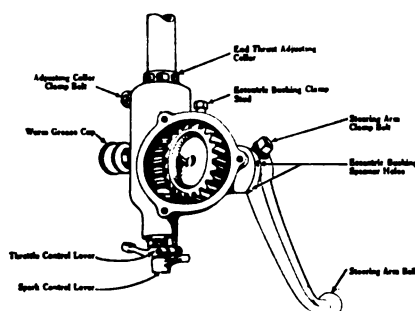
IN WHICH IS SHOWN THE "INNARDS" OF THE STEERING GEAR
